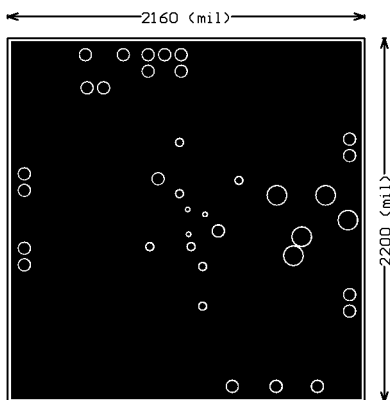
Recommended YZR PCB Layout: Bottom Layer
